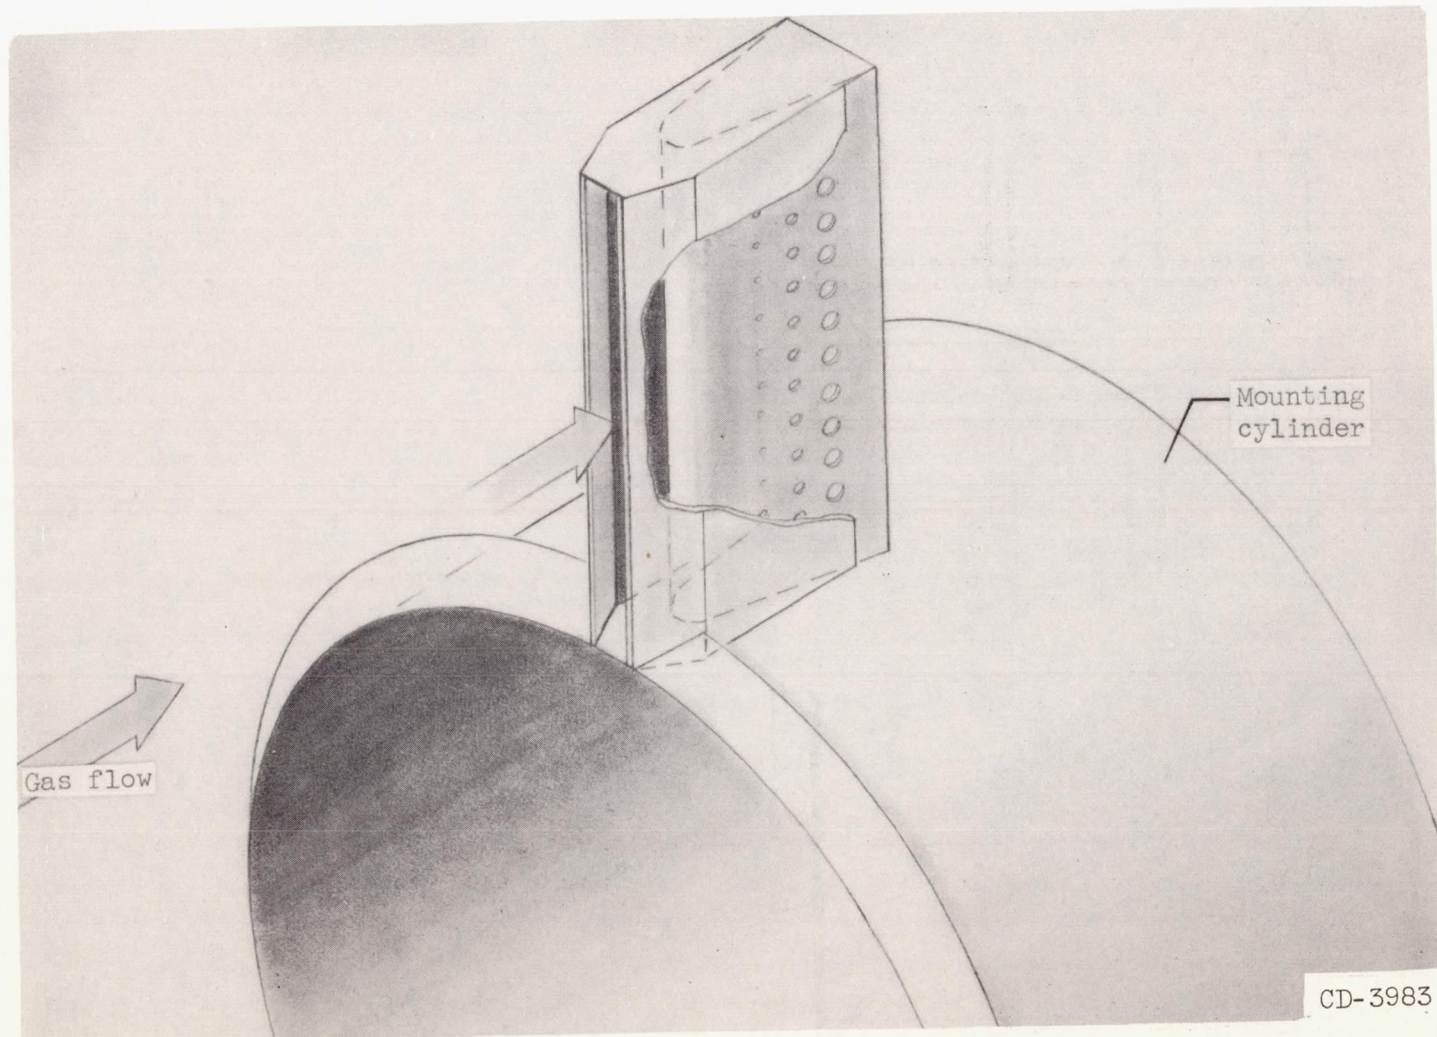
Continued. Sketches of type 4 flame holding elements investigated.
